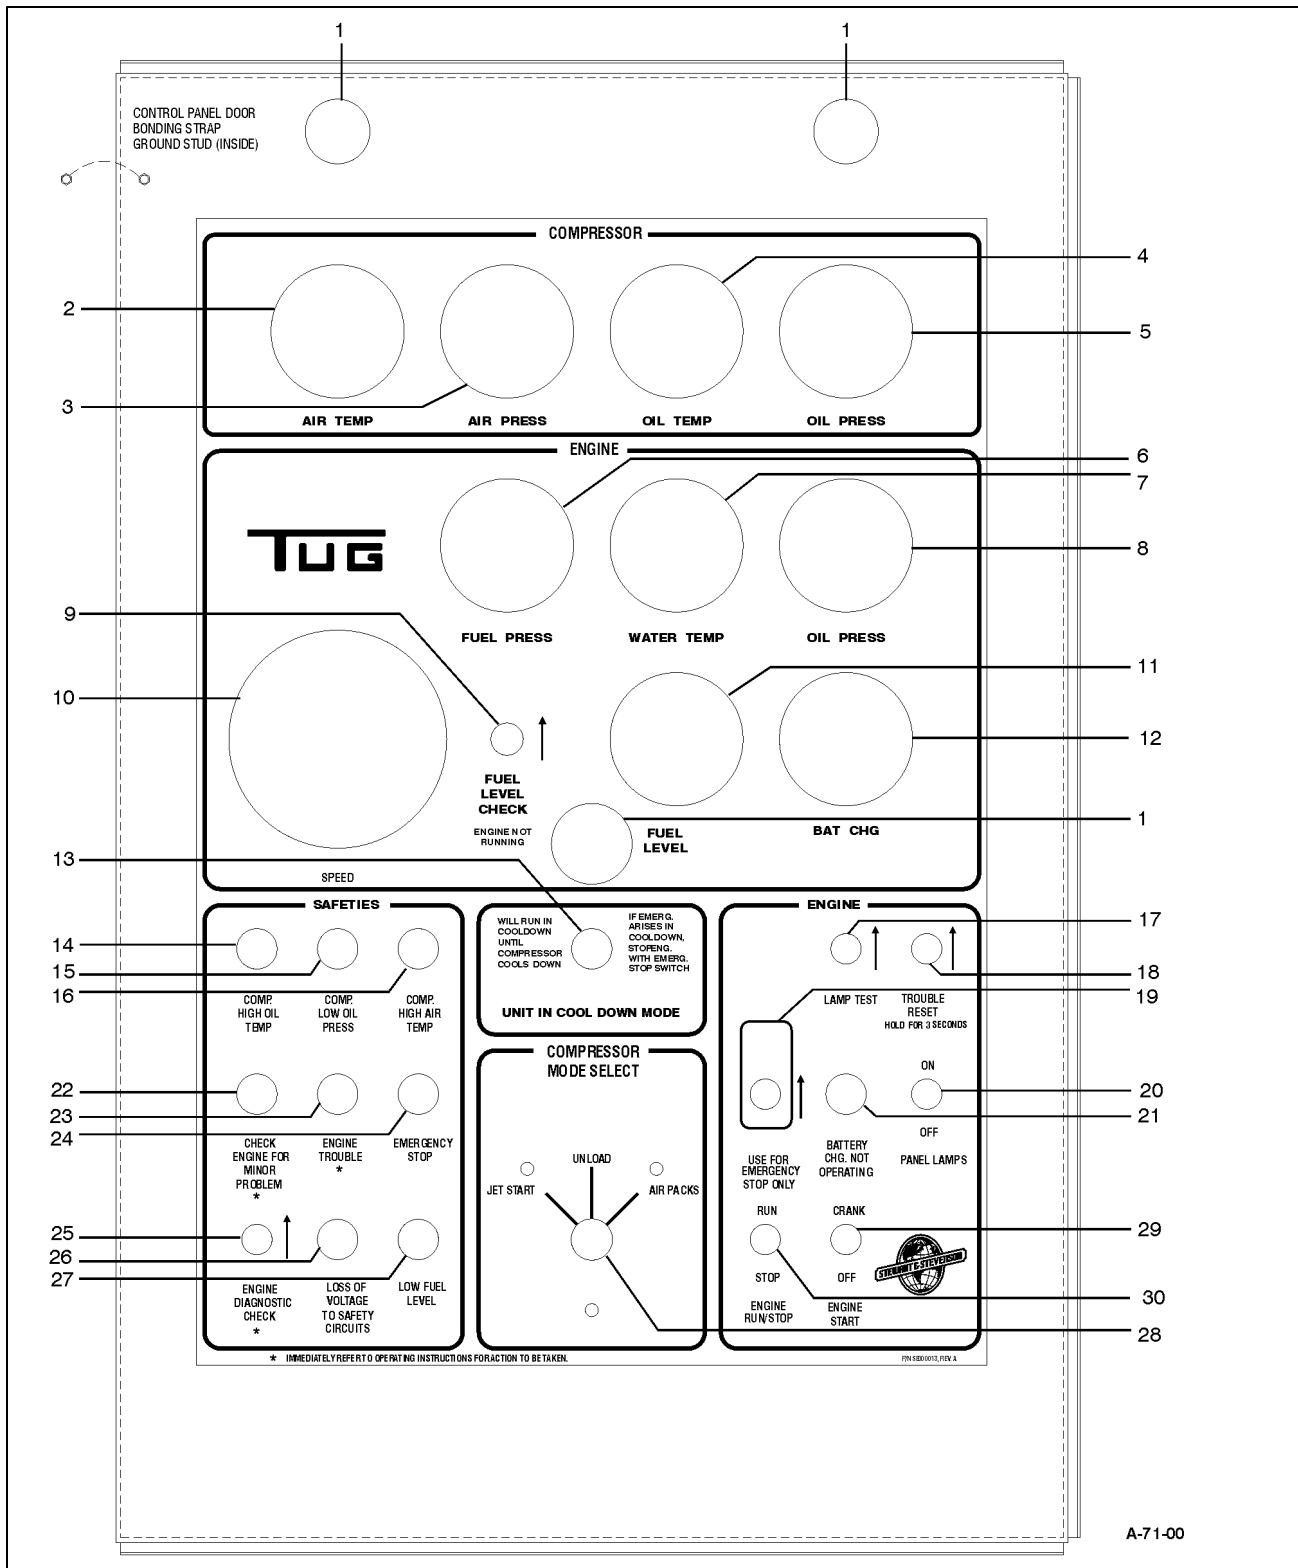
Control Panel, Assembly (Sheet 1 of 2)
